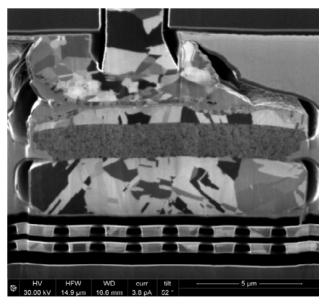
Zoomed-in view of Cu TSV and Cu bump contact
